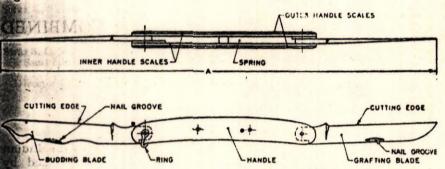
Assembly of Budding and Grafting Knife, Combined
